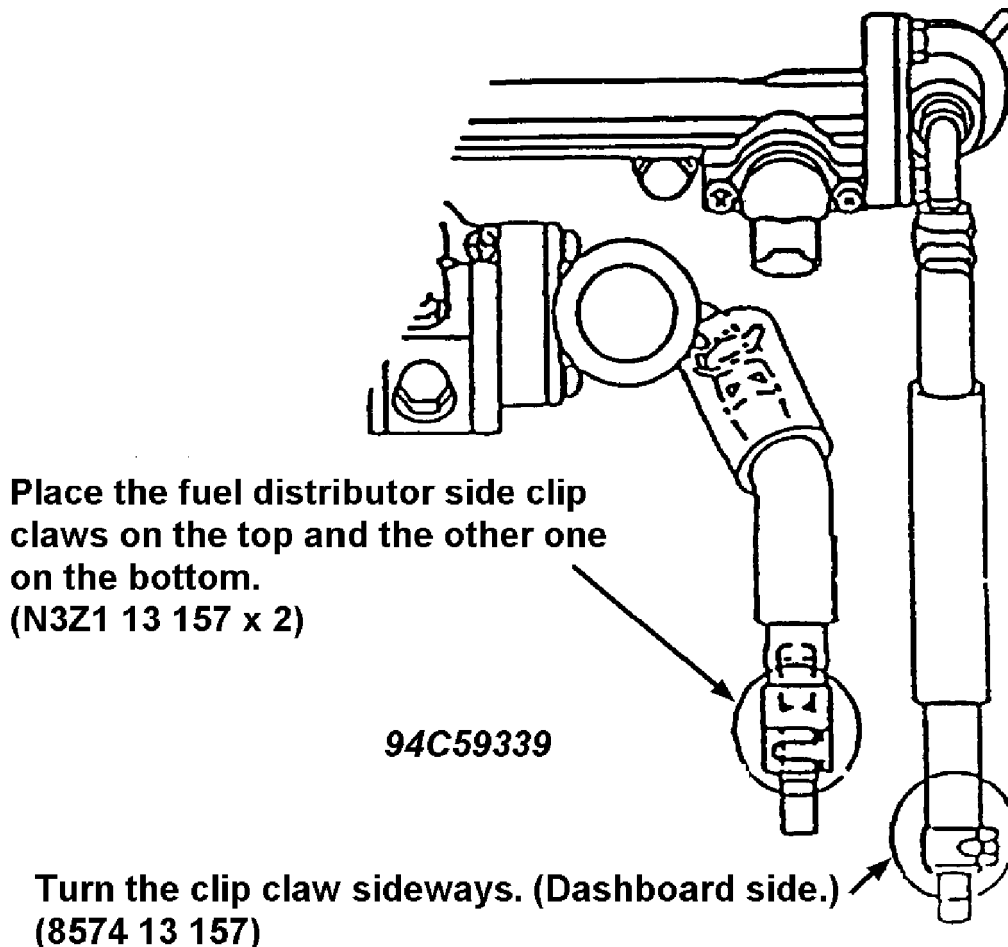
Connecting Hose Fuel Distributor & Vacuum Pipe Assembly
